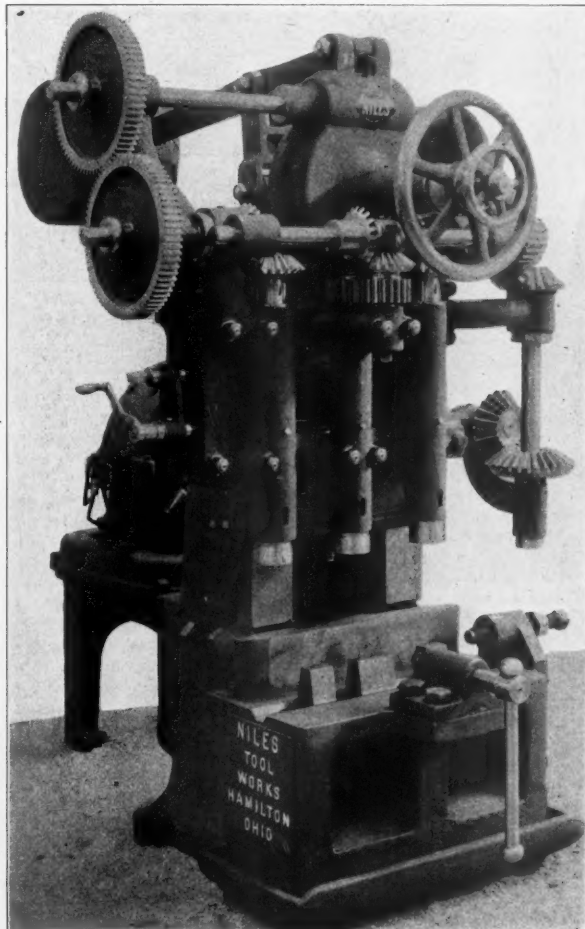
The Niles-Bement-Pond Rail Drilling Machine.
